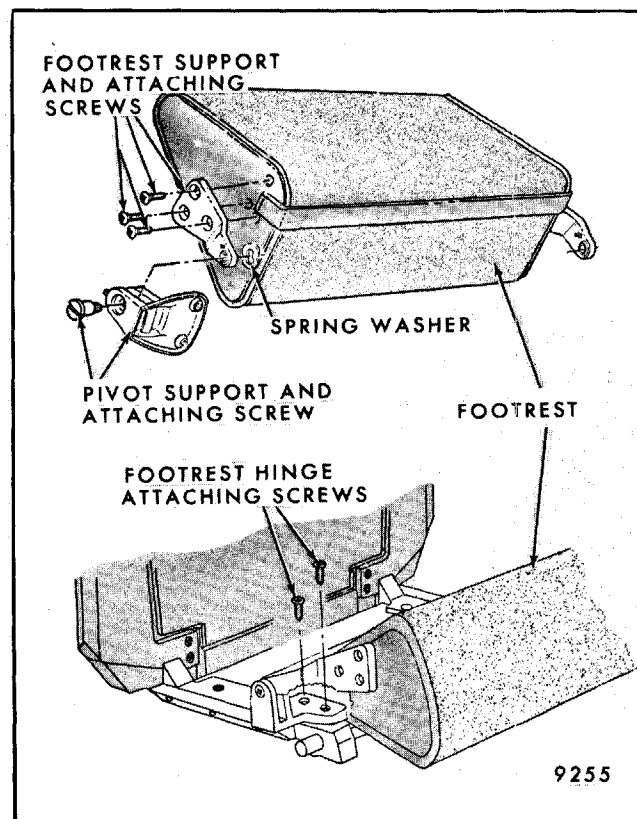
Auxiliary Seat Footrest Assembly - Removal and Installation - Cadillac Limousine Styles
